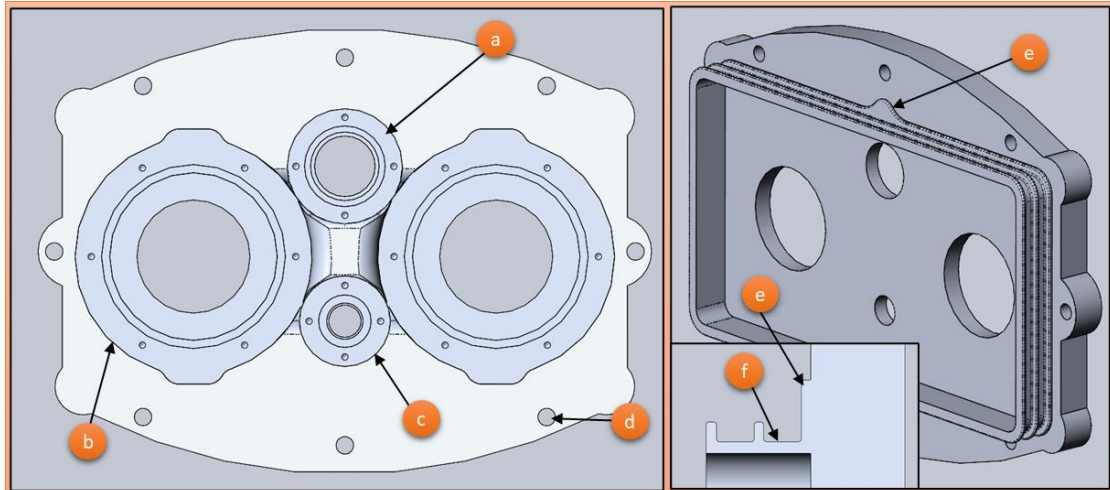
IP SH lid final design; a: Top lasers pocket, b: 2×Camera pocket, c: Bottom lasers pocket, d: Box connection (4×M5 clearance holes), e: Contact boss, f: Flange O-ring groove.
